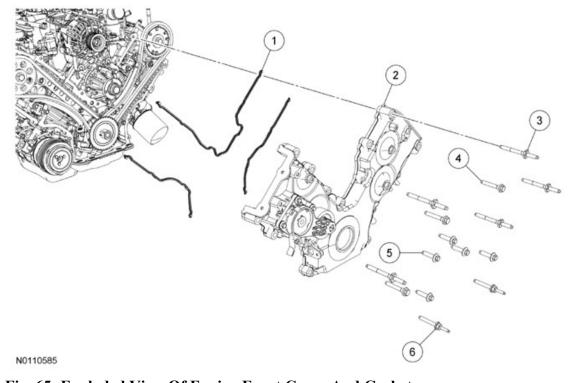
Exploded View Of Engine Front Cover And Gaskets
